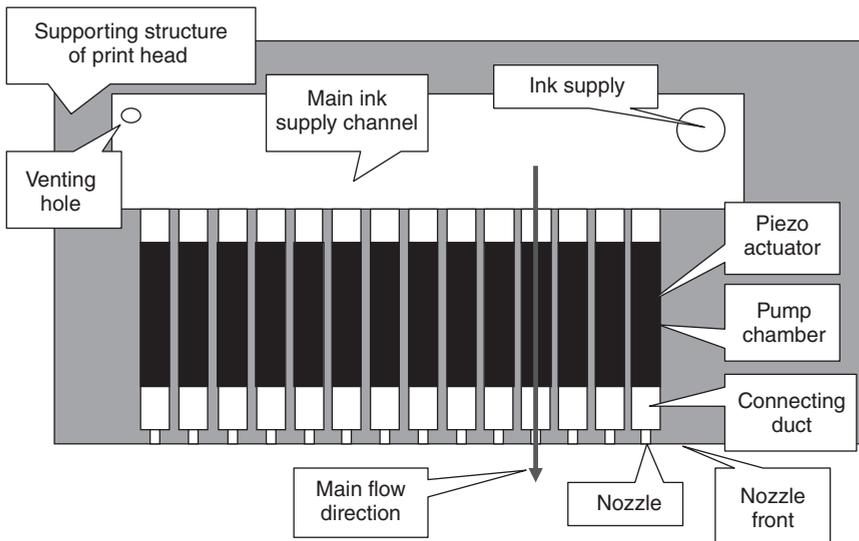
Basic layout of a closed end/open end multi-nozzle print head with pump chambers of which the length is large compared with the cross-sectional dimensions. The connecting duct towards the nozzle and the connection to the main ink supply channel may both have different cross-sectional dimensions compared with those of the pump section. The arrow symbolizes the main flow direction.
